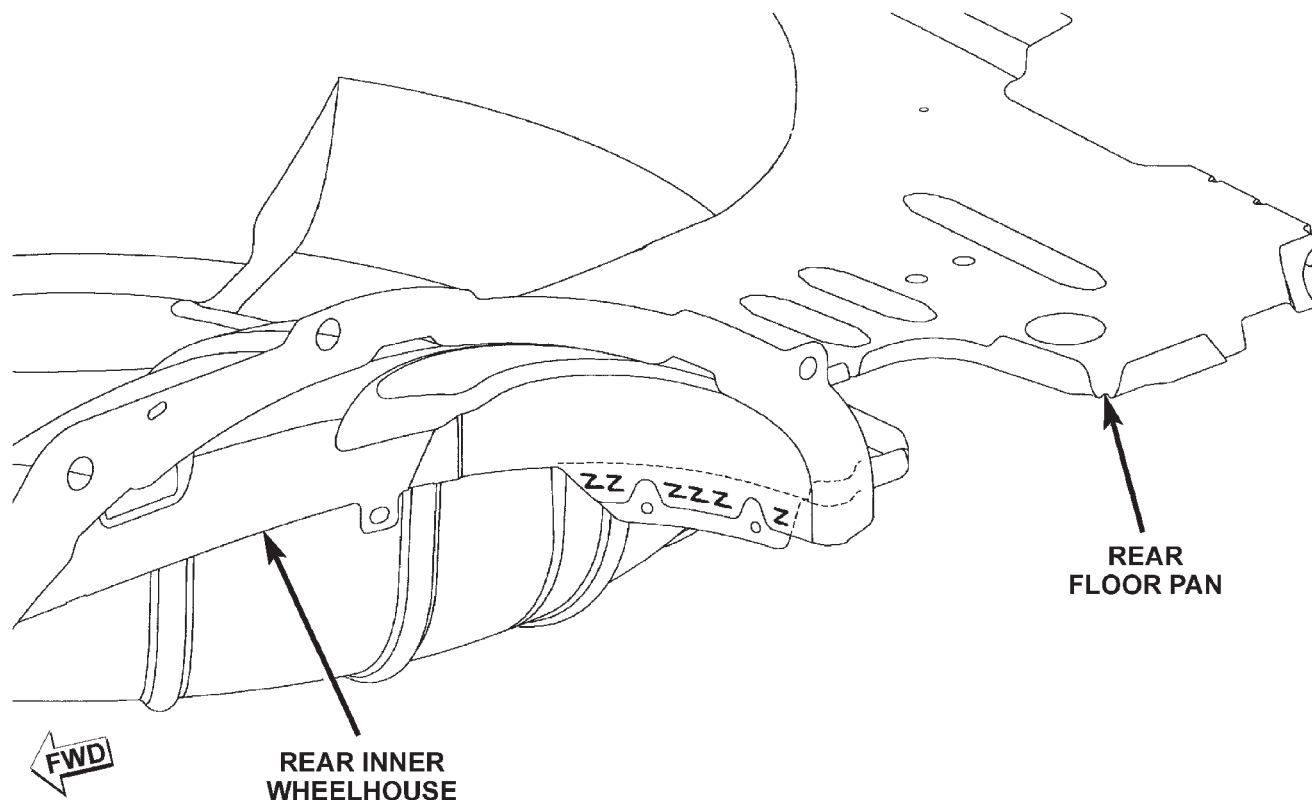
REAR INNER WHEELHOUSE AND REAR FLOOR PAN
